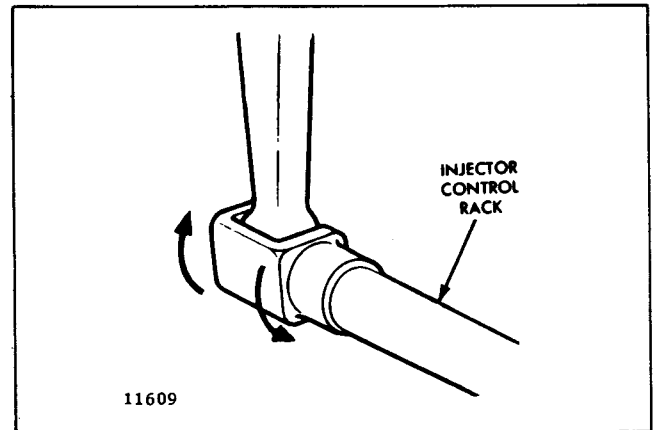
Checking Rotating Movement of Injector Control Rack
